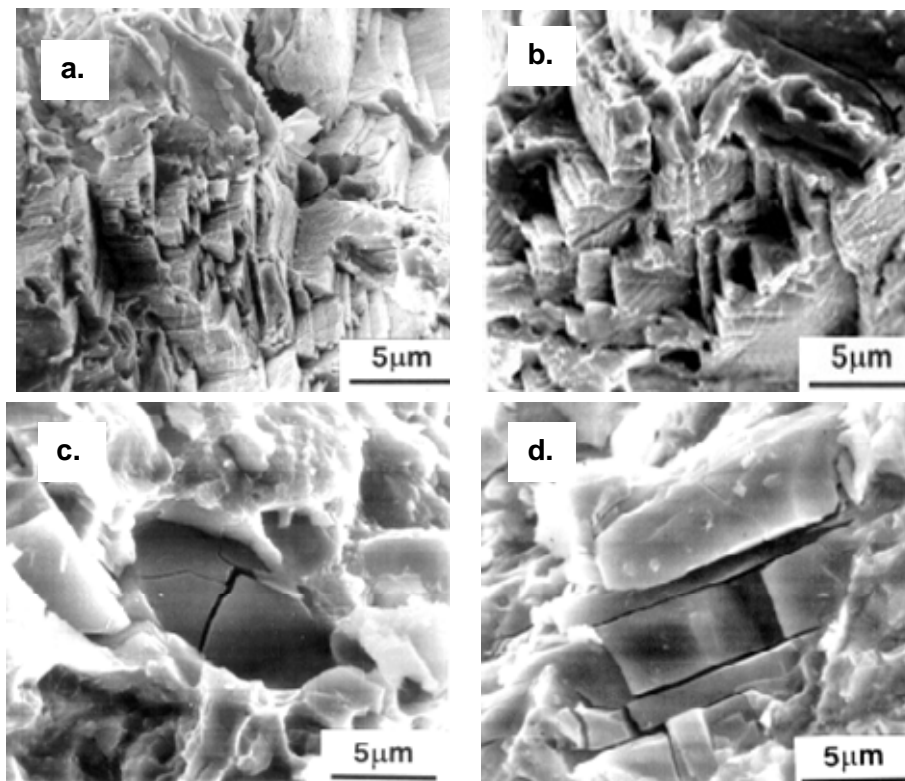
SEM fractograph. Brittle fracture of IN 100 superalloy turbine blade. Note the fractured MC carbides in c,d [10].
